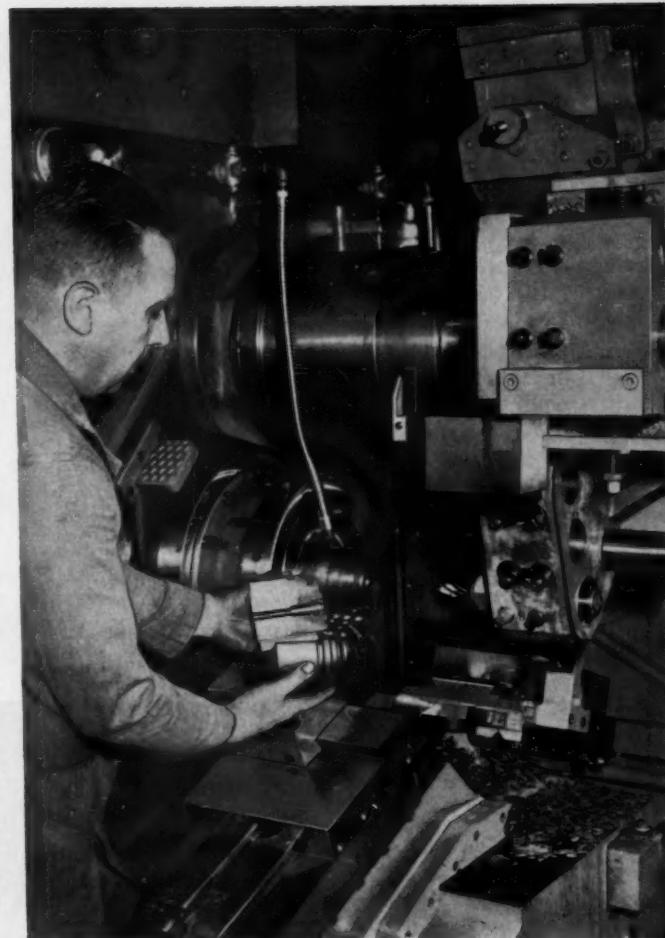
Turret lathe operations have resulted in substantial mold-production increases at Toledo Mold Co.
